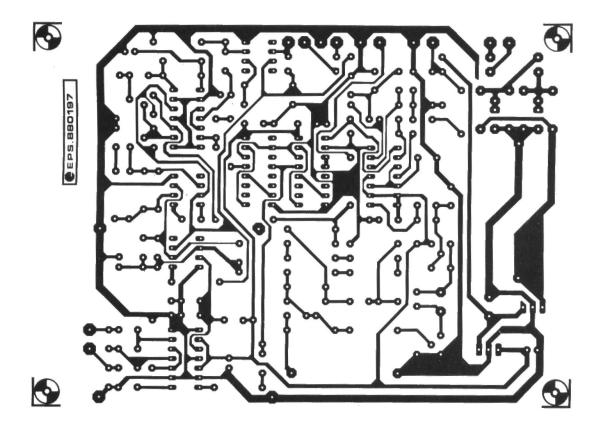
Track layout and component mounting plan of the printed-circuit board designed for the frequency reference.
